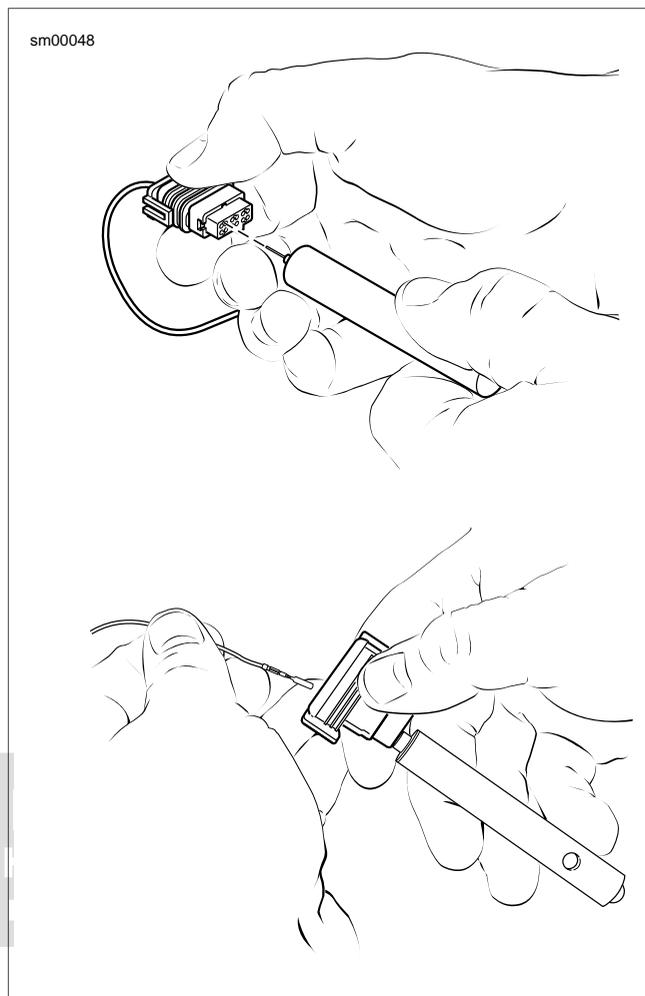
Packard Micro 64 Connector: Insert Tool and Remove Terminal
